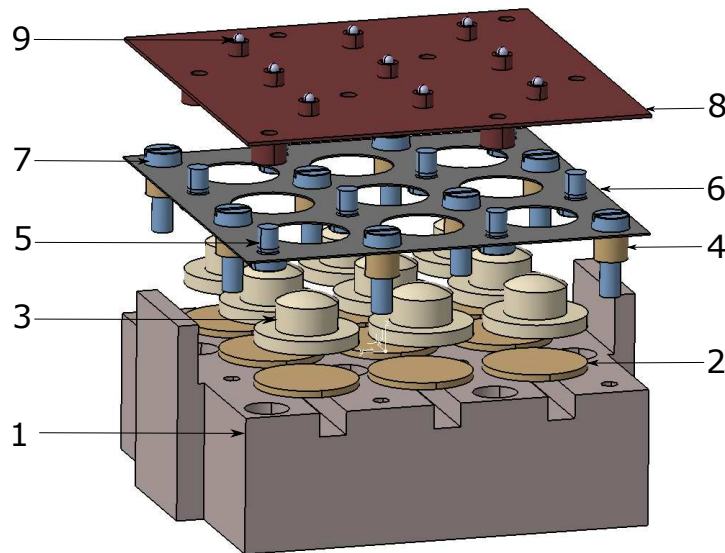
Exploded 3D view of the various mechanical parts constituting the instrumented slider. 1: Aluminum base. 2: Piezoelectric elements. 3: Sphere-ended aluminum fitting parts. 4: Hollow cylinder-shaped spacer. 5 & 7: M3 screws. 6: Hollow carbon steel spring plate. 8: Carbon steel top plate, featuring 8 threaded hollow cylinders on its bottom, and 9 sphere holders on its top. 9: Bearing steel sphere.
